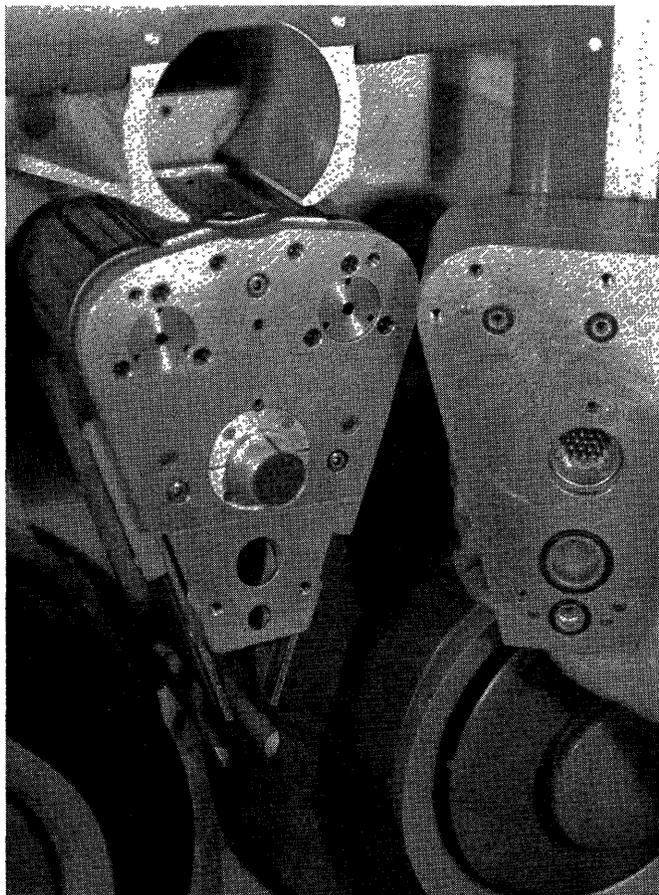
Capstan assembly, with valve and actuator assembly removed. Note slotted surfaces of capstan
